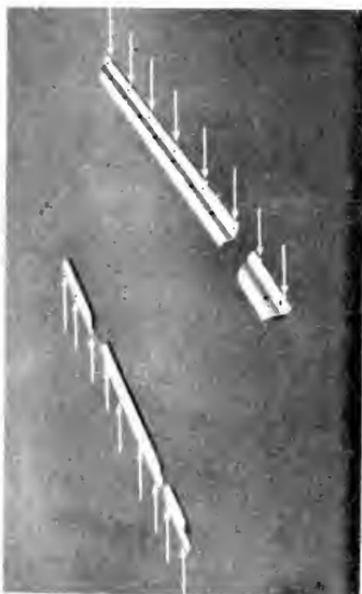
Method of Attaching Light Bars to Deck Plating by Spot Arc Welding
